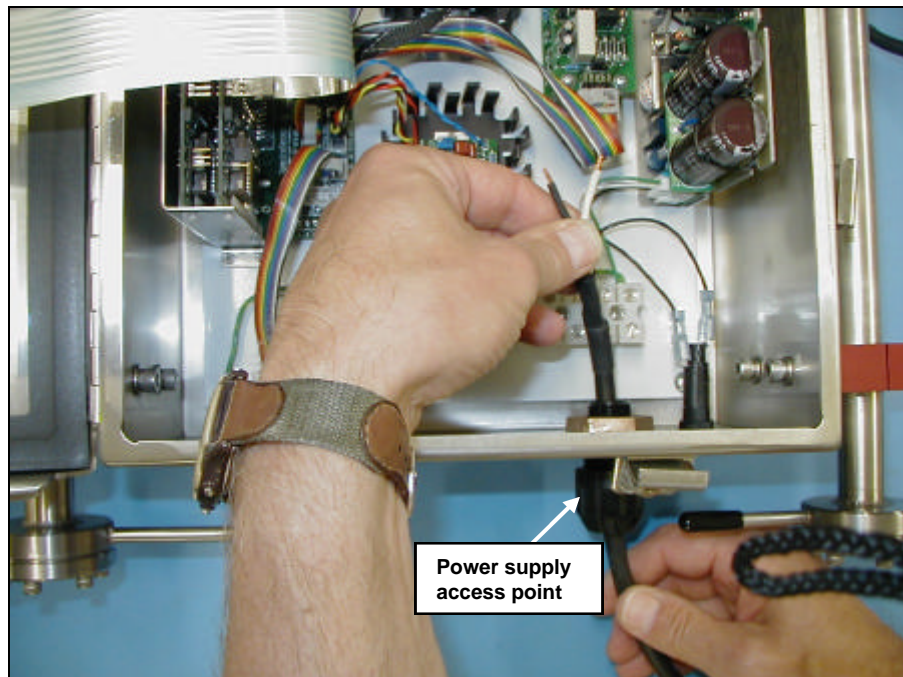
Thread power supply through the right side access point at the bottom of the enclosure.
